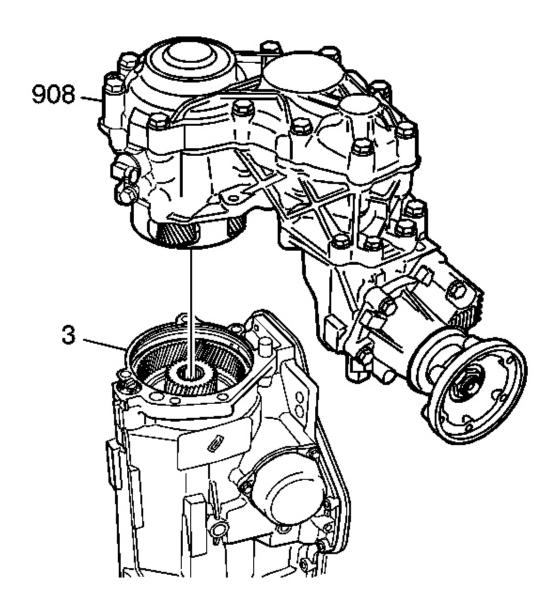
View Of Transfer Case Assembly Courtesy of GENERAL MOTORS CORP.
